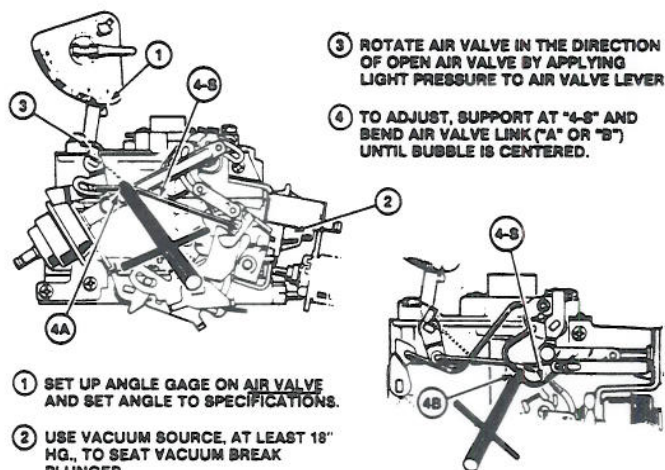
Air valve rod adjustment (Typical). 2SE & E2SE carburetors
